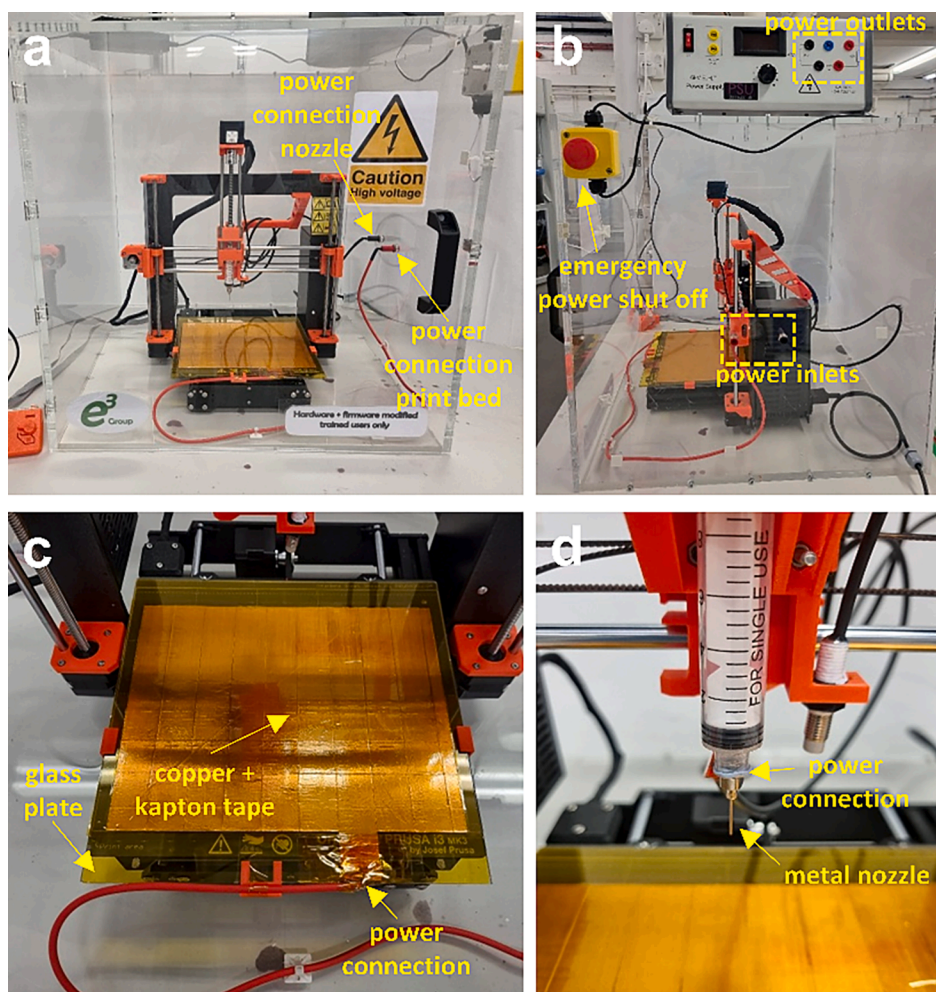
Additive manufacturing – direct ink writing setup modified for in-situ electrical poling during printing: (a) 3D-printer inside custom-made enclosure for safe operation; (b) external power supply and enclosure with power inlets and emergency switch-off system; (c) modified print bed (glass plate, copper layer and Kapton tape) connected to positive power supply cable via a soldered connection; (d) metal nozzle connected to negative power supply cable via a solder tag.
